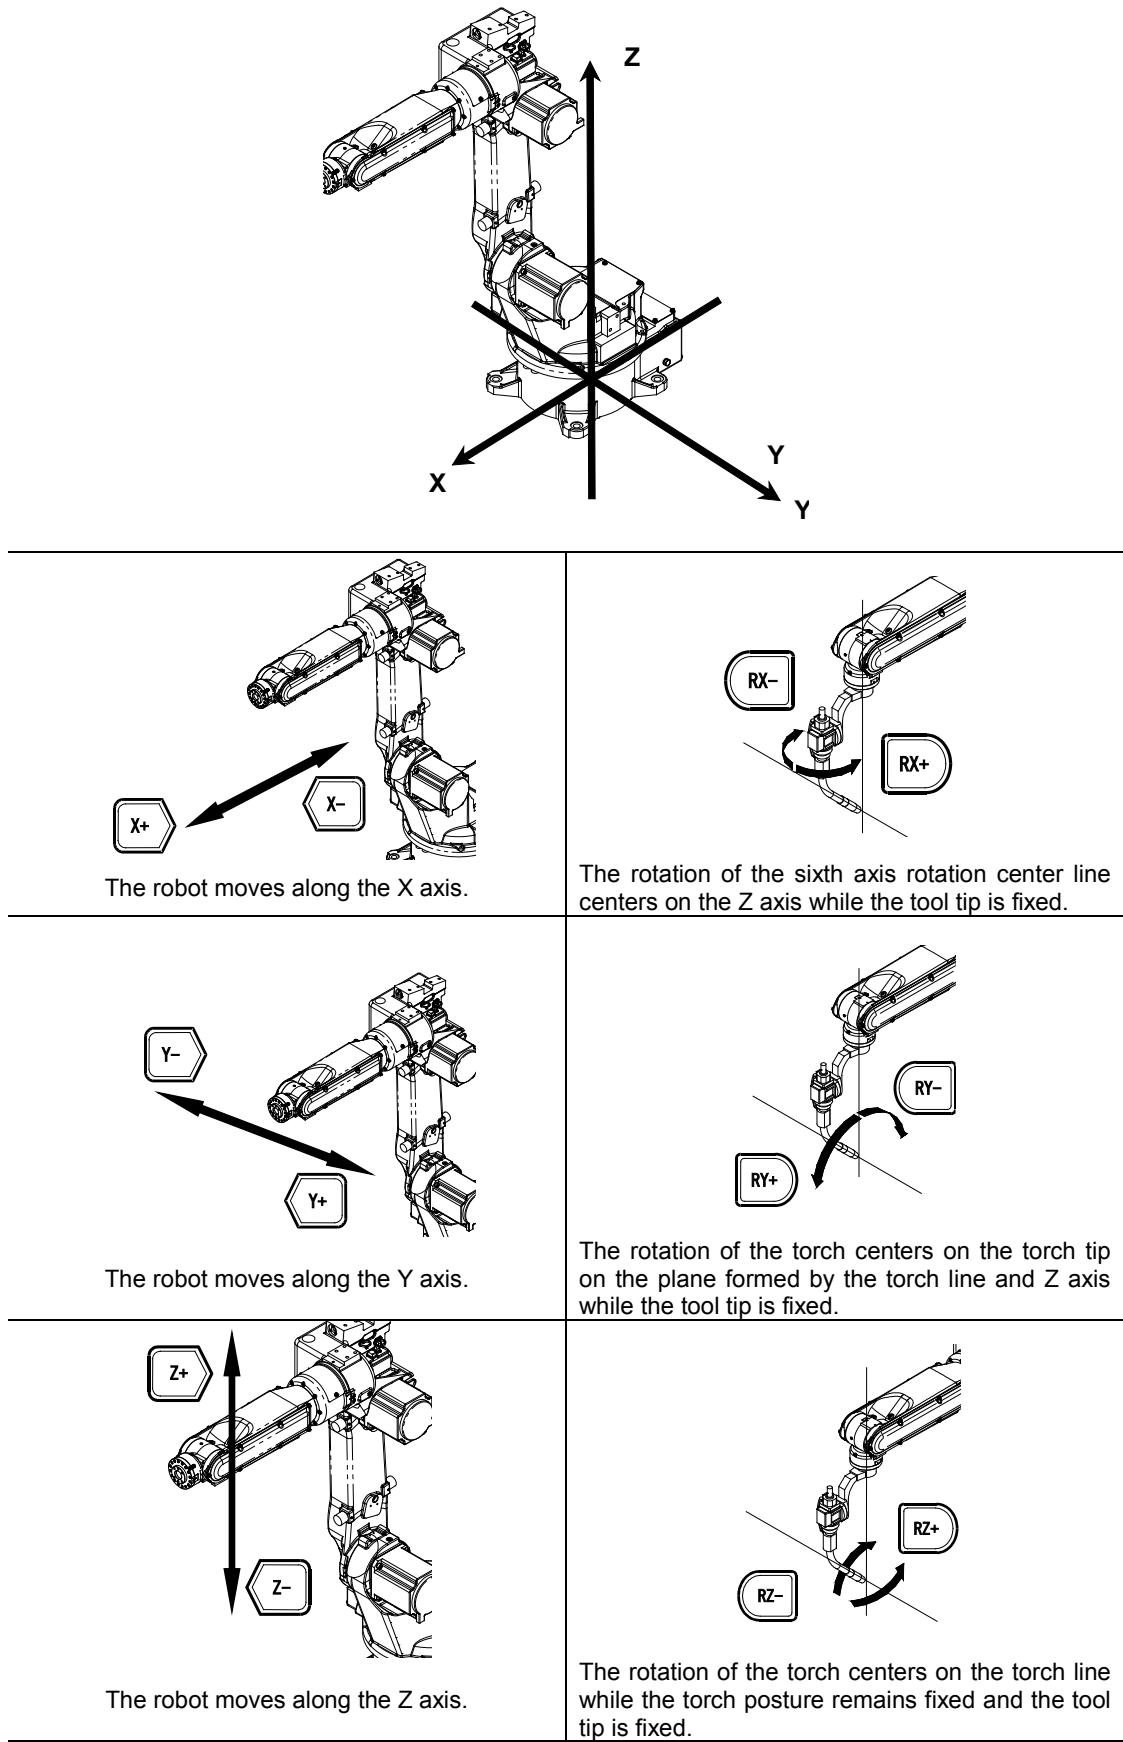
Movement directions in the robot coordinate system (for the arc welding application)
